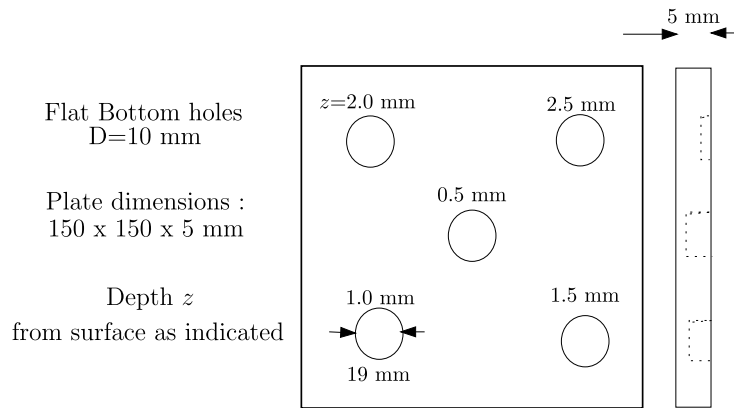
Aluminum sample (ALUM02) with flat bottom holes.
